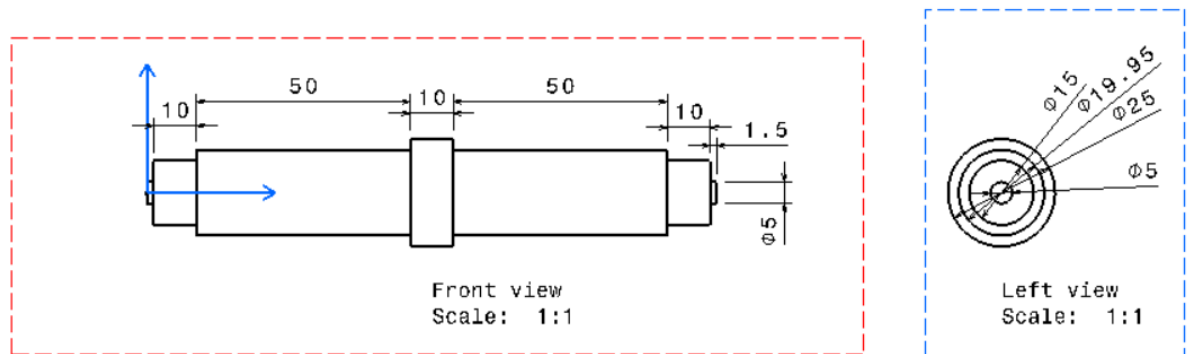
Two projection views of the FSW tool (all dimensions are in mm)
